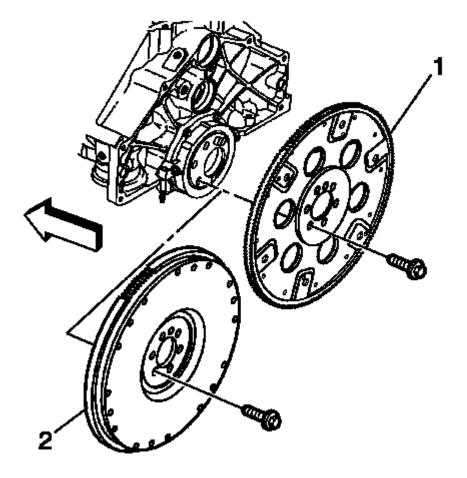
View Of Flywheels Courtesy of GENERAL MOTORS CORP.
